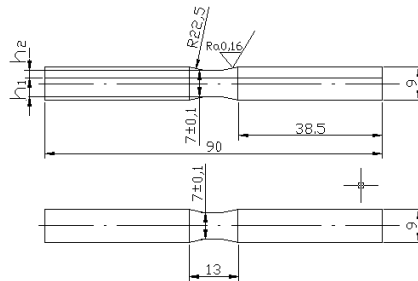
Shape and dimensions of specimen, dimensions in mm.
